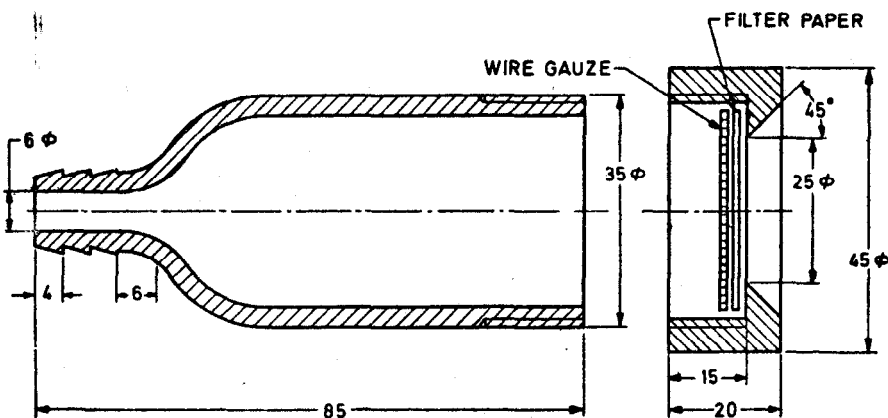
ASSEMBLY OF FILTRATION APPARATUS
